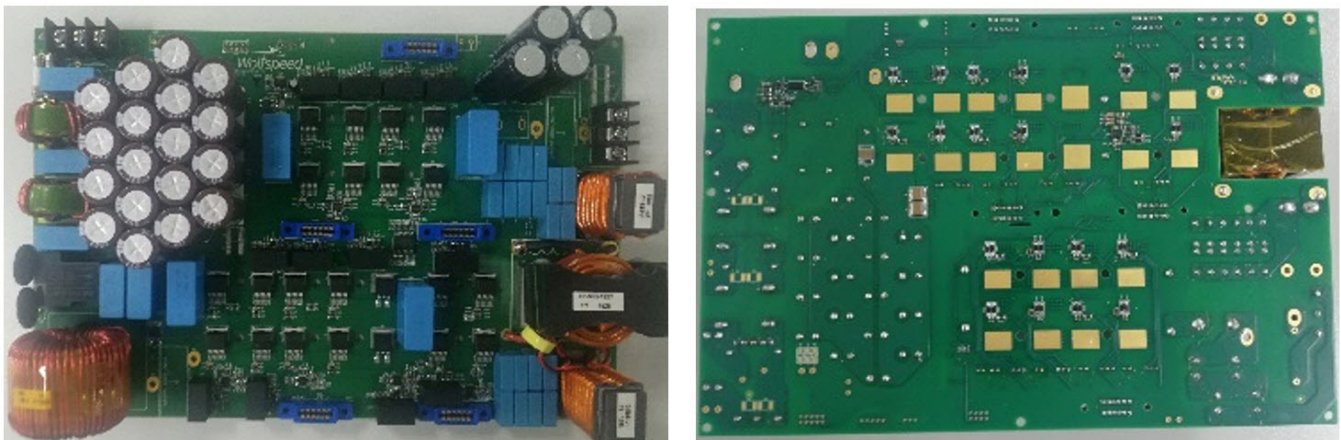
A 6.6-kW EV on-board charger reference design using a surface-mount SiC MOSFET package on an embedded-AlN PCB
